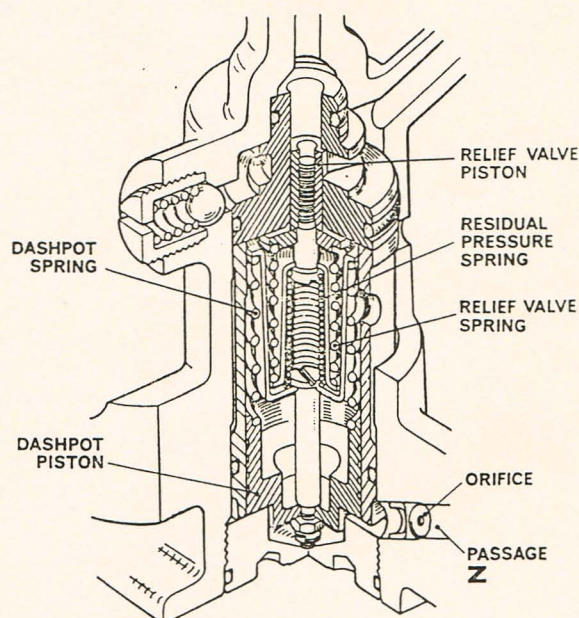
RELIEF VALVE AND DASHPOT ASSEMBLY
